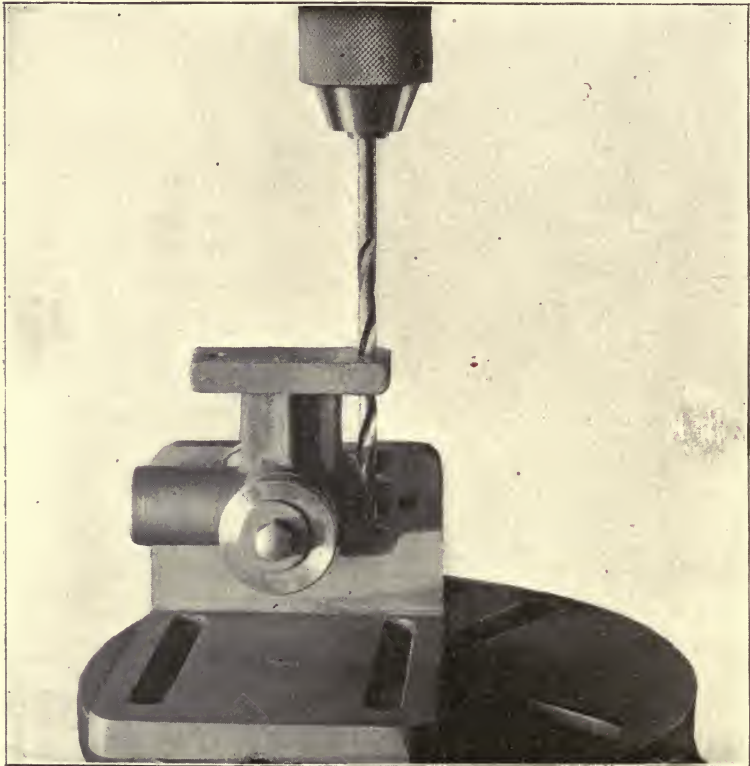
DRILLING MAIN BEARING ON DRILL PRESS.
